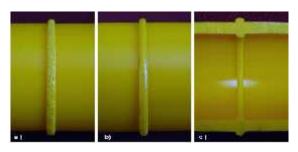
a) Inappropriate welding parameters b) Appropriate welding parameters c) Appropriate welding parameters and pipe internal surface appearance [18]
